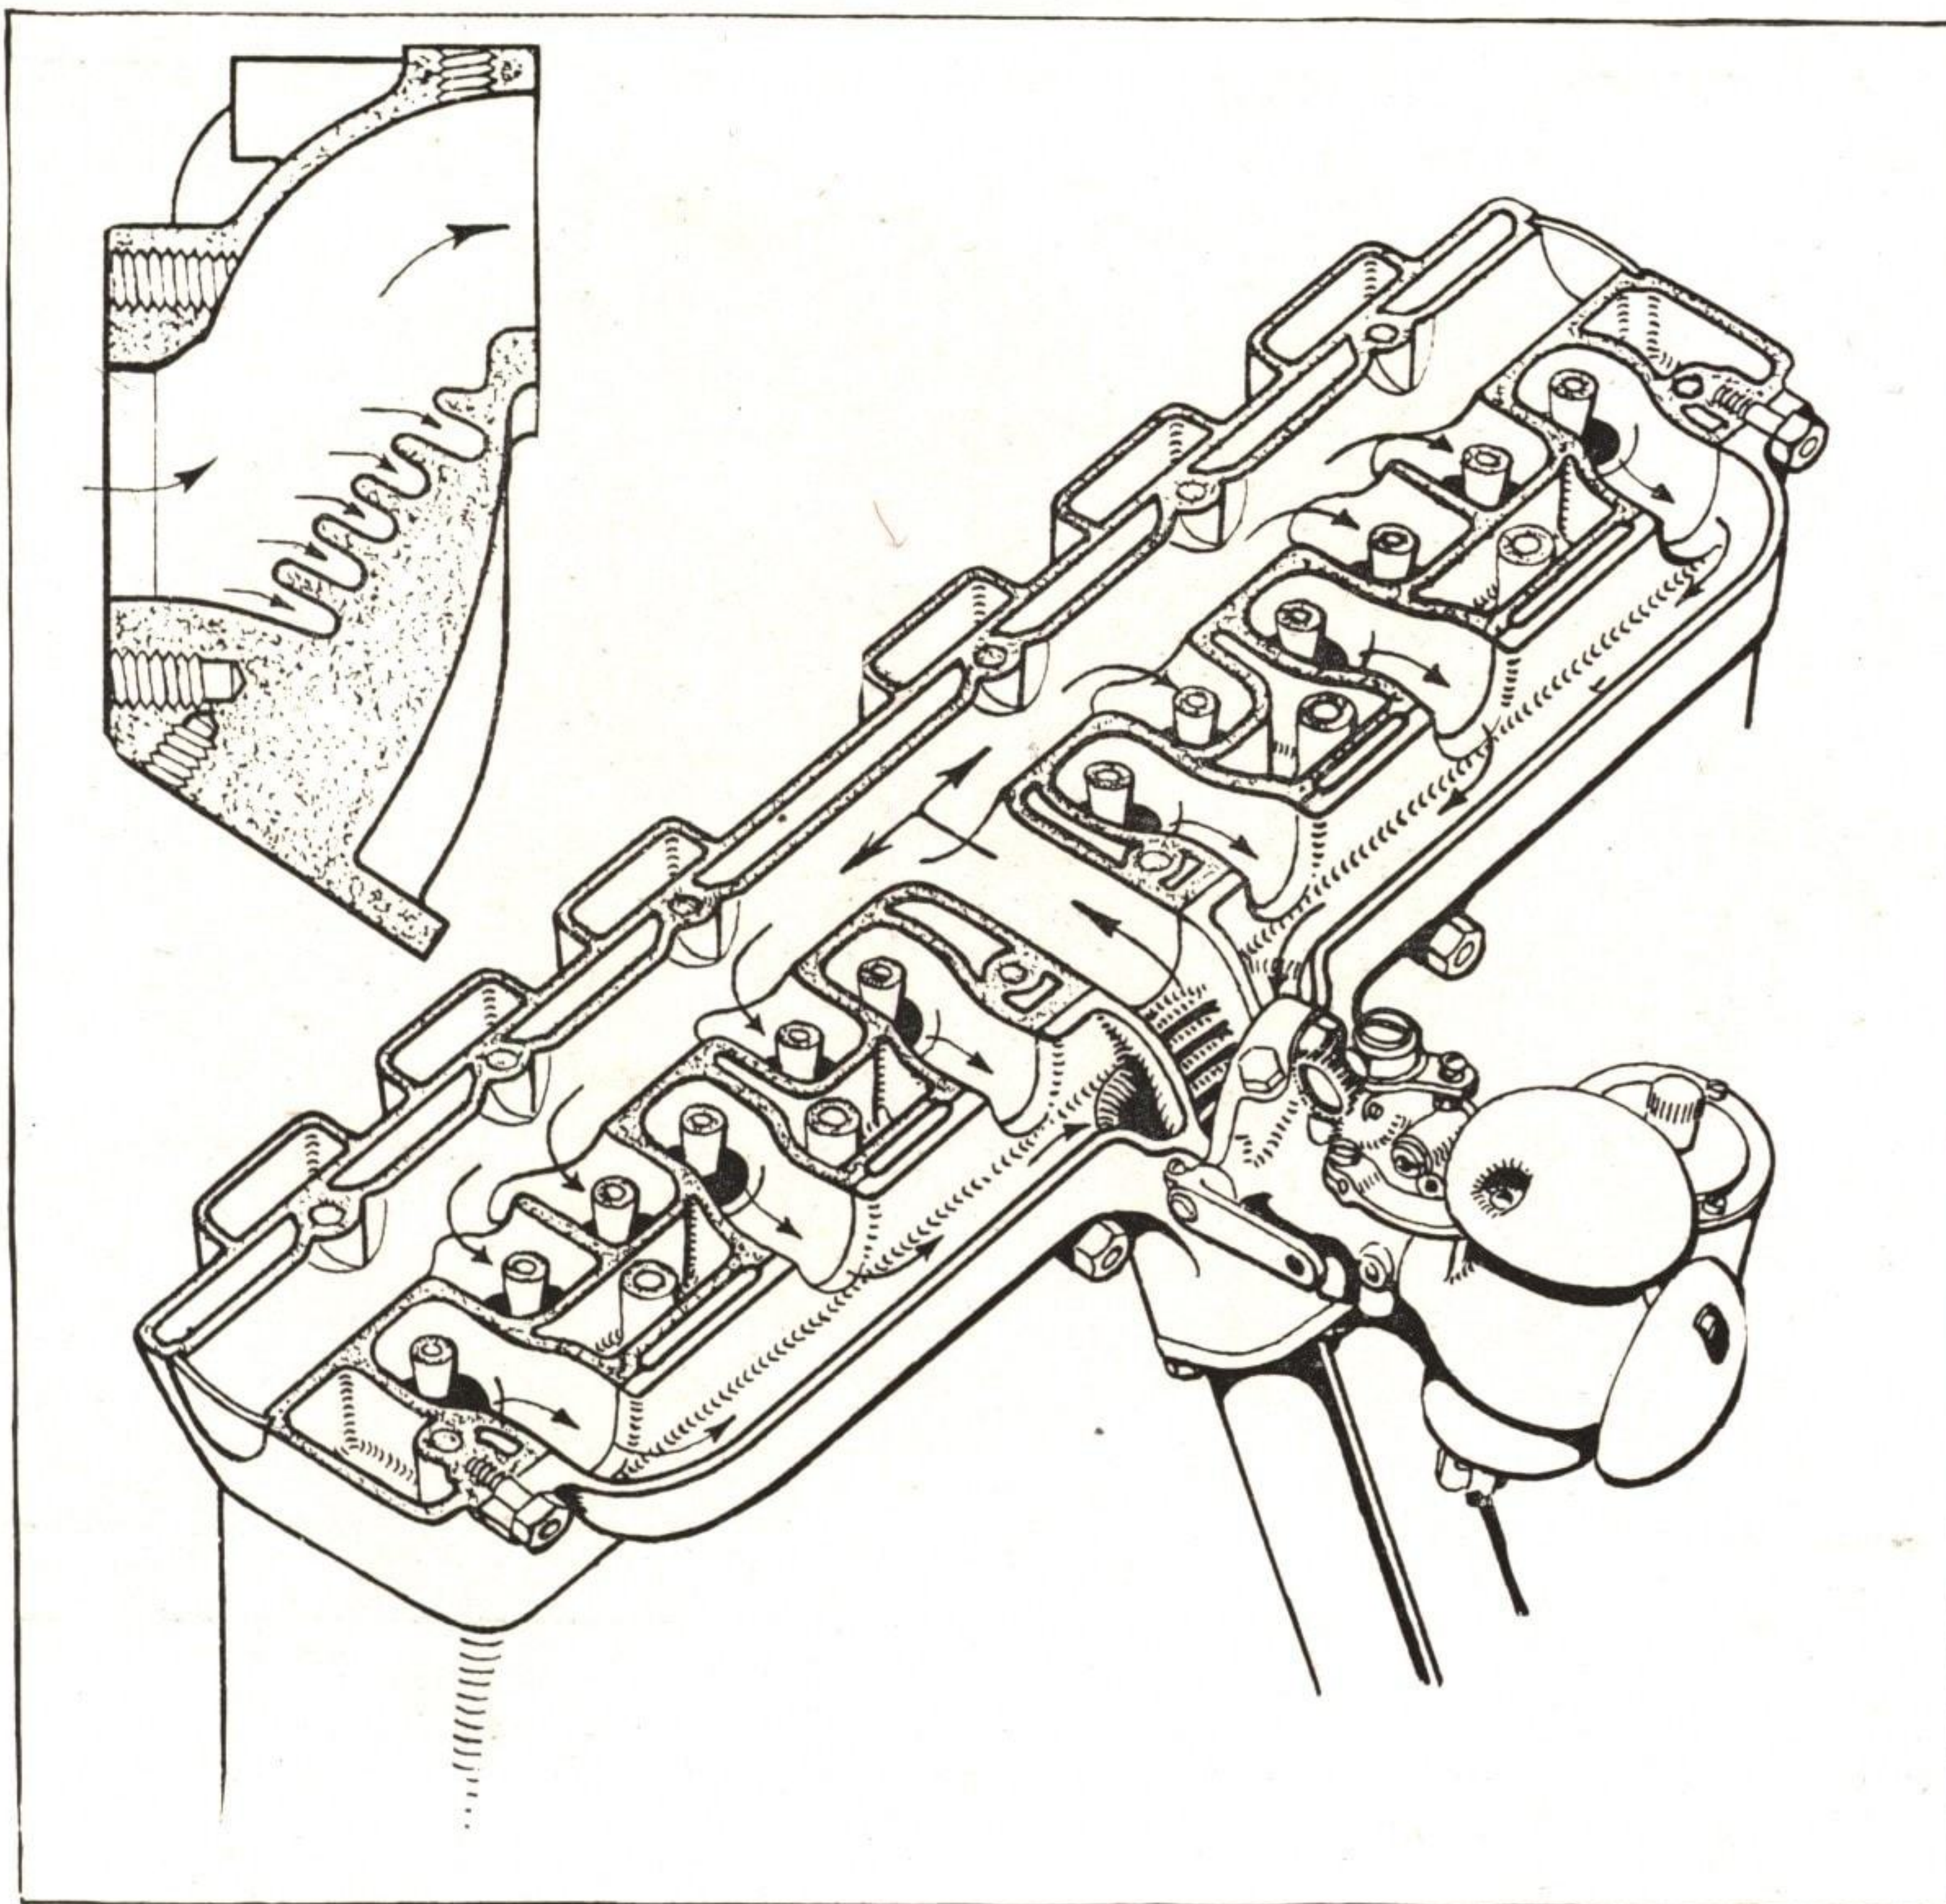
Section of Lexi-gasifier and Cylinder Head
